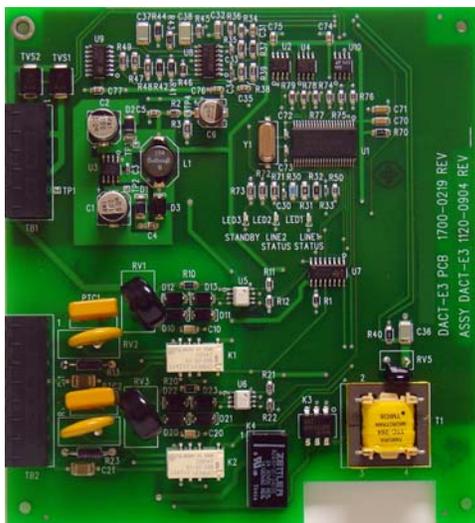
DACT-E3 Transmitter Sub-Assembly
